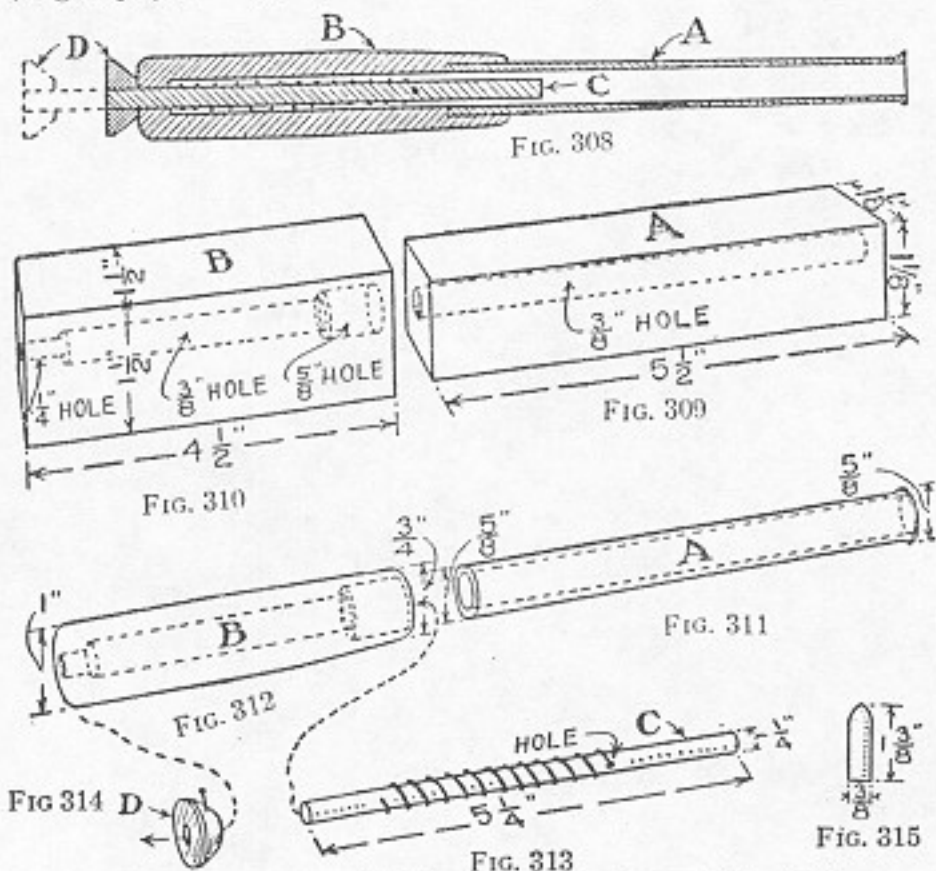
Longitudinal Section of Gun Shown in Fig. 307
